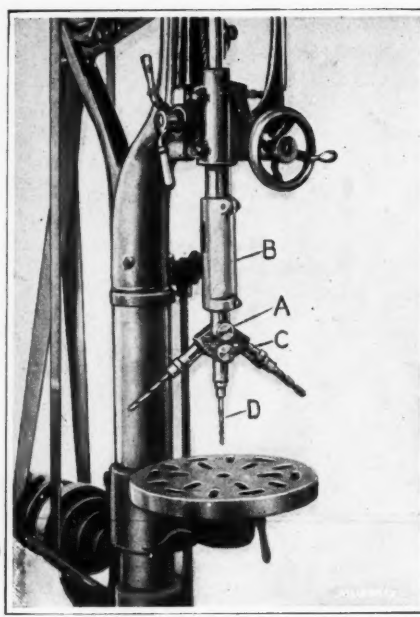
Eisler Drill Press Turret Head with Sleeve Connection to Spindle
